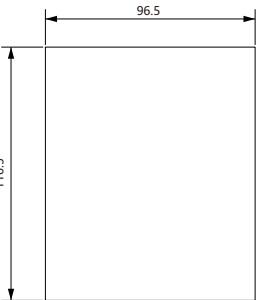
tray hole size (panel sheet metal thickness 1.0-1.2mm)
